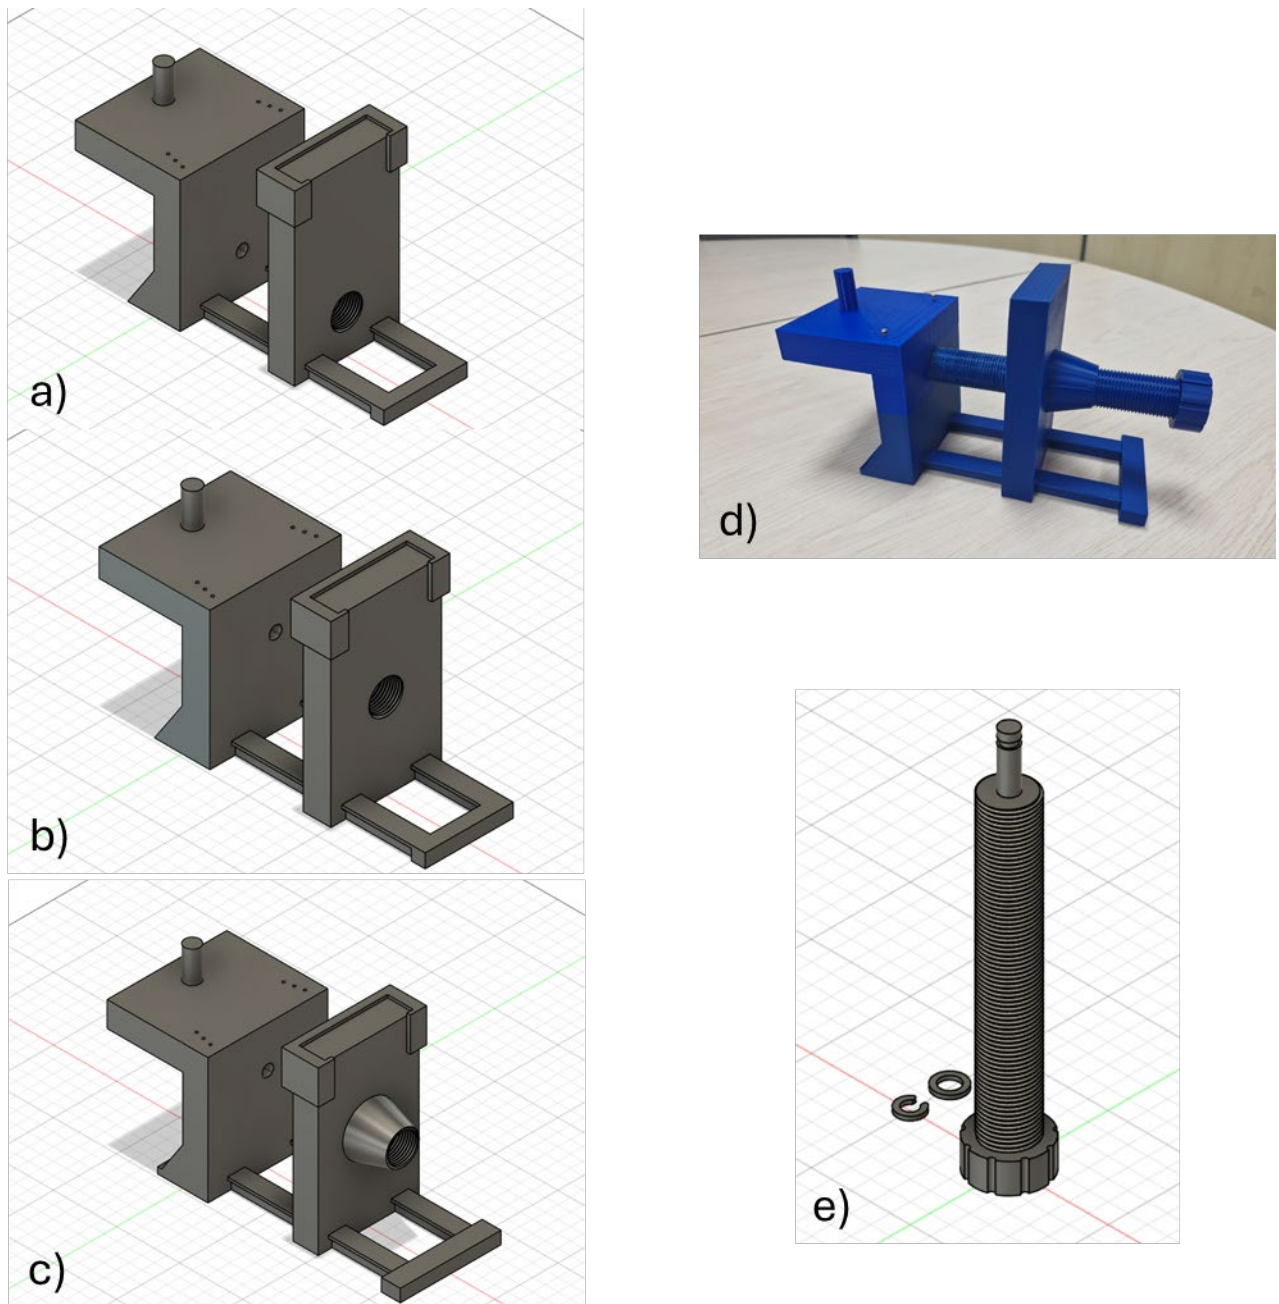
Apparatus design iterations: (a) bottom-screw layout; (b) top-screw layout; (c) reinforced top-screw layout; (d) refined top-screw layout; (e) detail view of the screw-and-support mechanism (authors' work).
